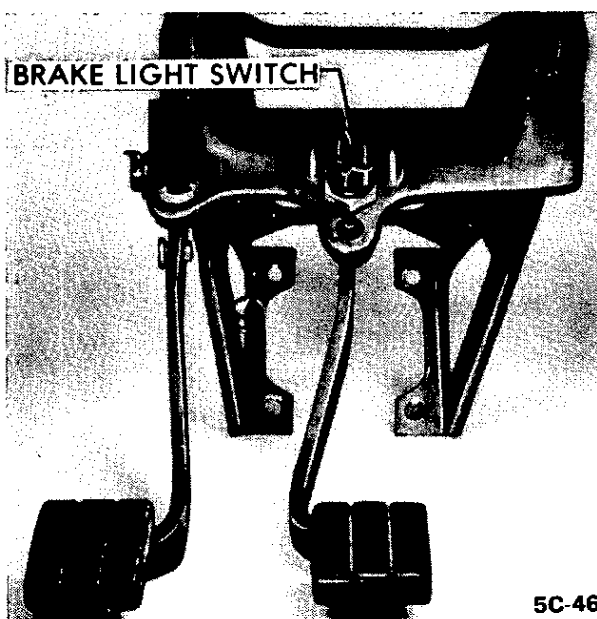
C-46 Brake Light Switch - Opel 1900 and Manta
